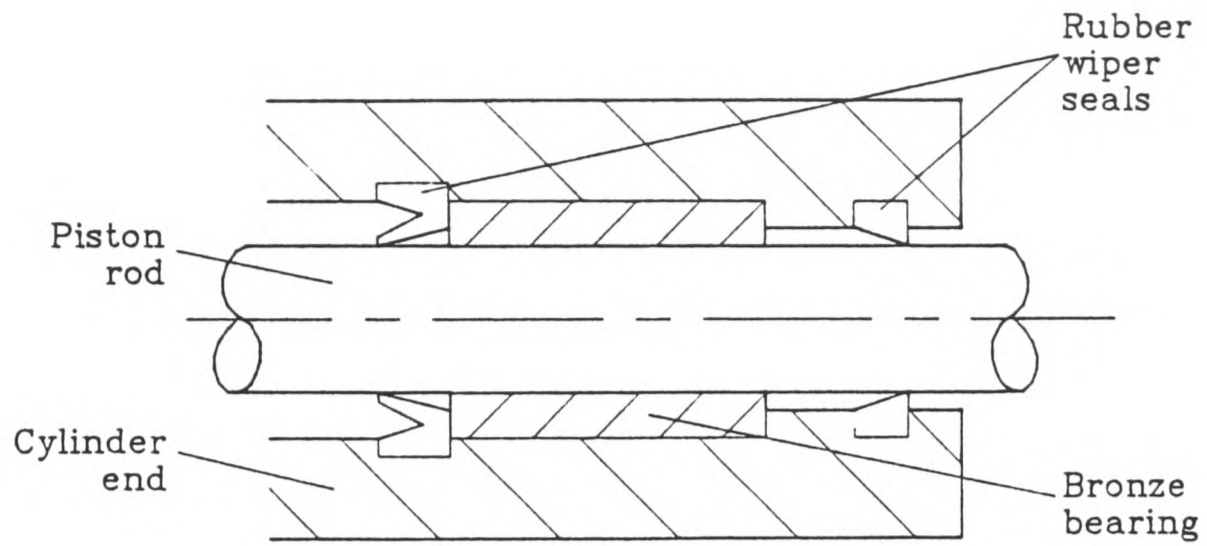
Piston rod seal and bearing. Actuator Type 0.
